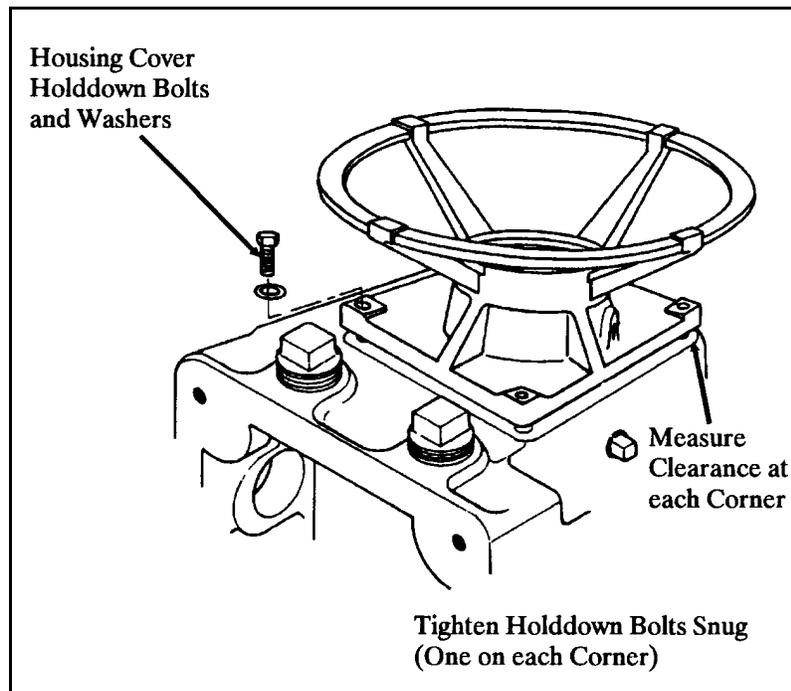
Spring Cartridge Cap Assembly Installation (New Style)
